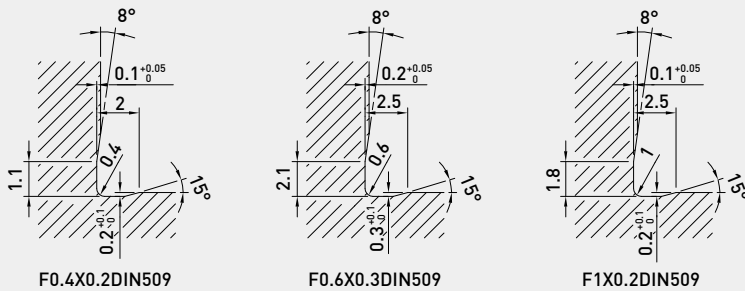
Suggested chamfer dimension per DIN 509 for the "A" dimension in Fig 4.10
